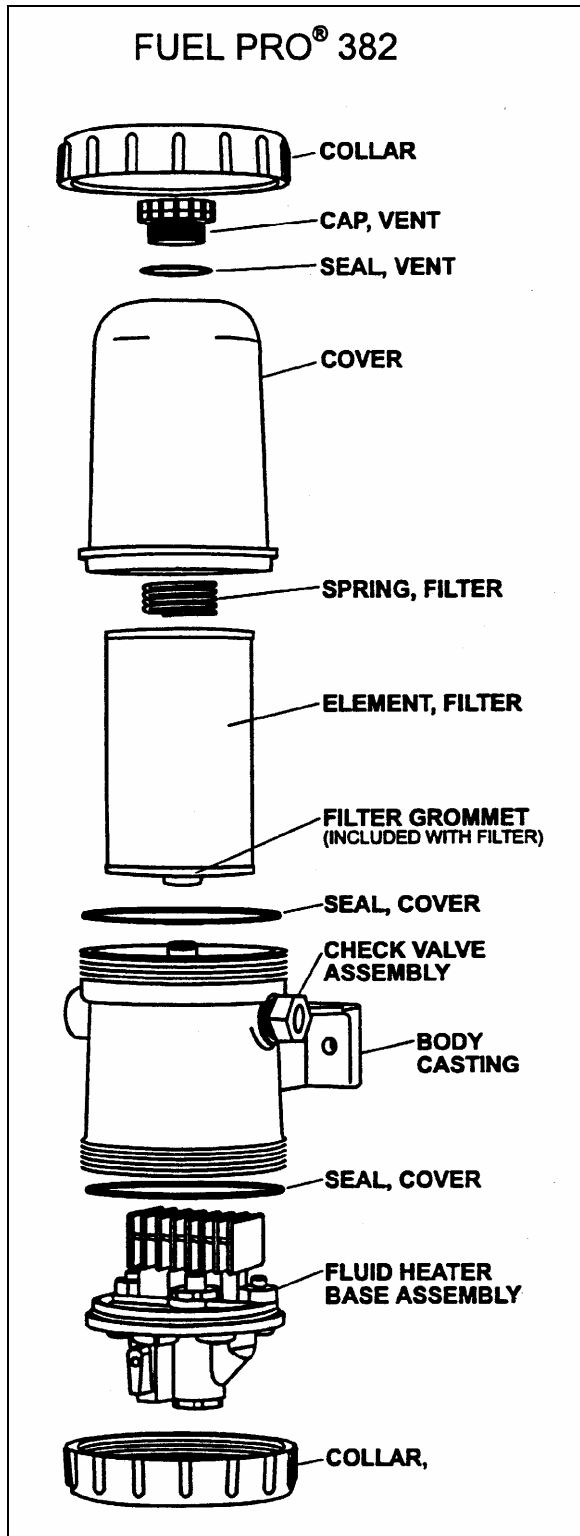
DAVCO FUEL PRO 382 EXPLODED VIEW 03034
